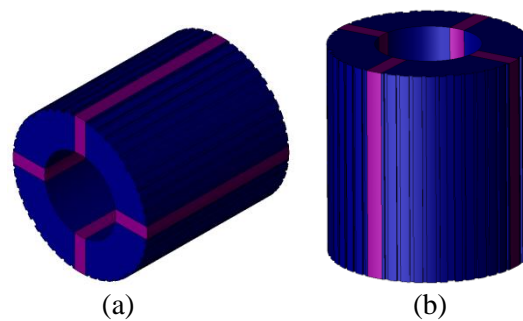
Notching rotor model a) Isometric view b) Rotor top view
